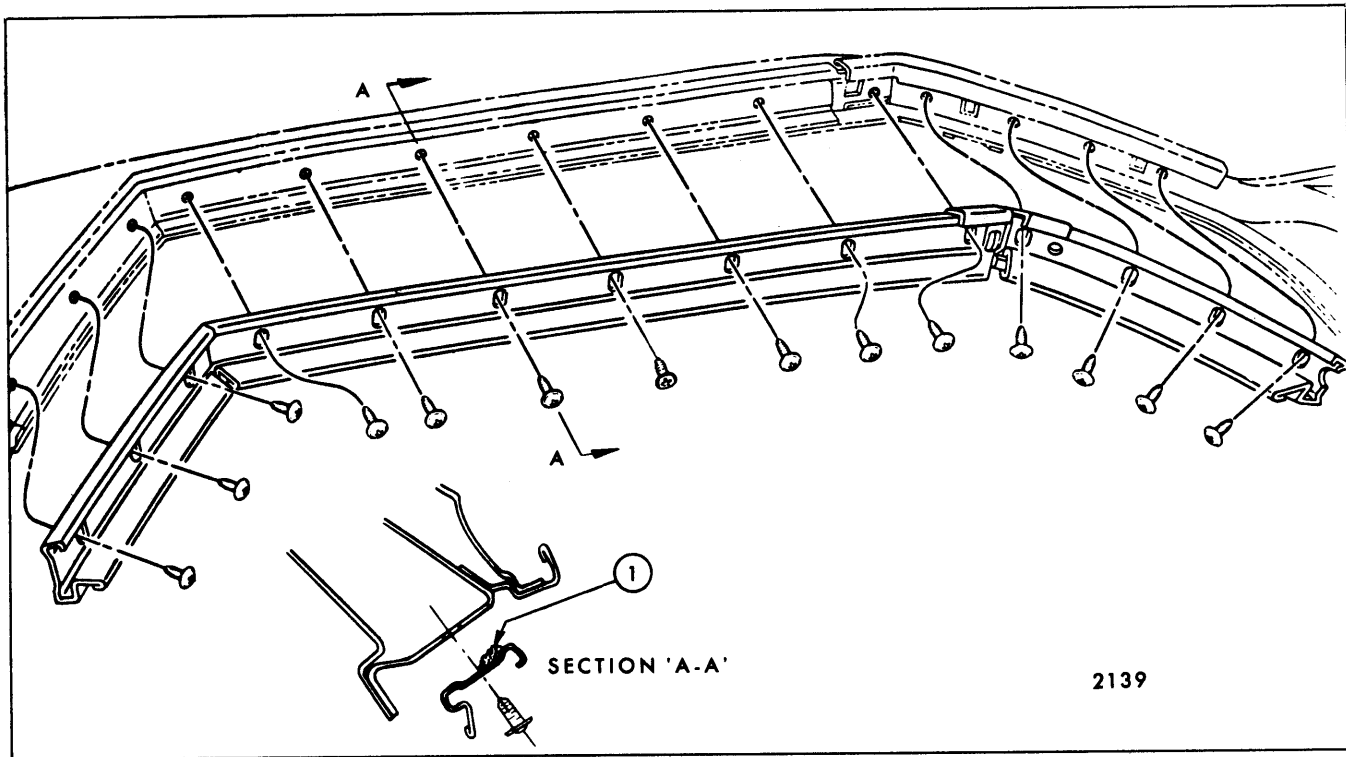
Typical Side Roof Rail Weatherstrip Retainer
